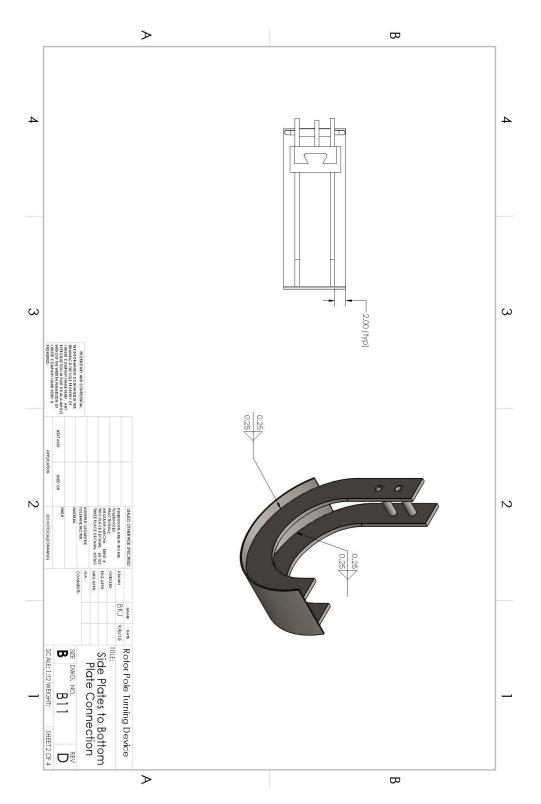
DRAWING OF SIDE PLATES TO TURNING DEVICE BOTTOM PLATE CONNECTION
